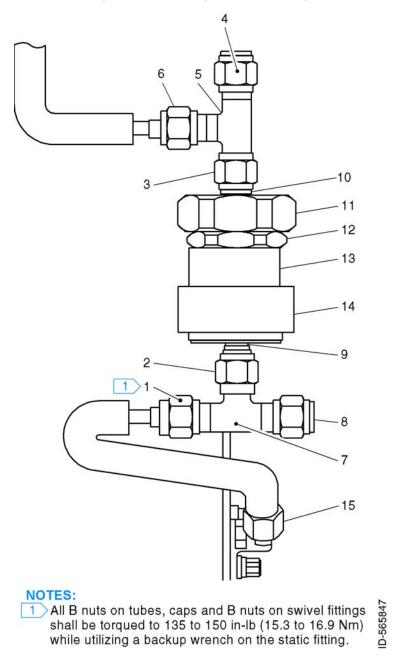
(Sheet 1 of 1) PC Filter Assembly (LTP101-600A-1A, LTP101-700A-1A)
